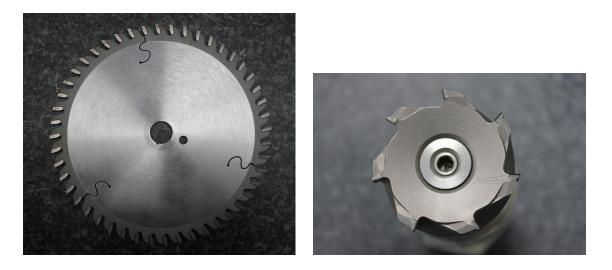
Tools: Saw blade for pre-cut (left) and a diamond head for final optical cut (right).
